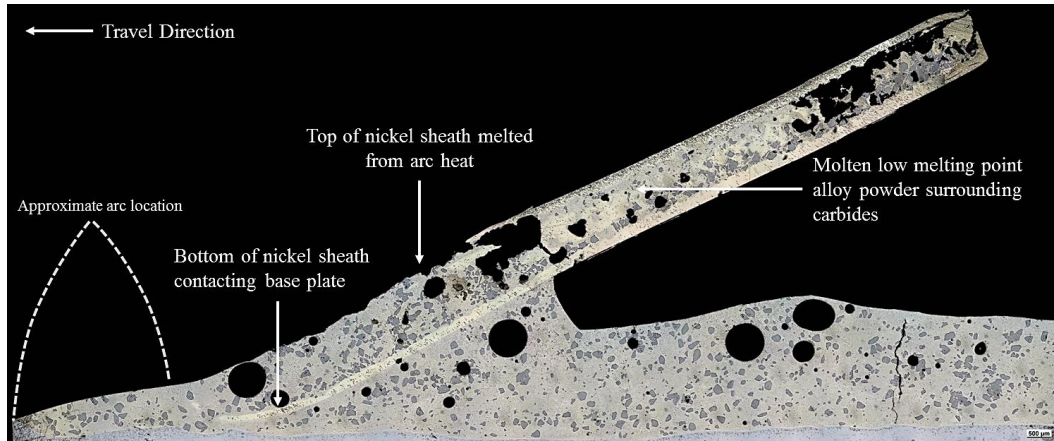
HWGTAW of Consumable A depicting the hot-wire frozen into the weld pool. High quantities of low melting point alloys of Al, Mg, and Si are suspected to be encasing the tungsten carbides inside the hot-wire.
